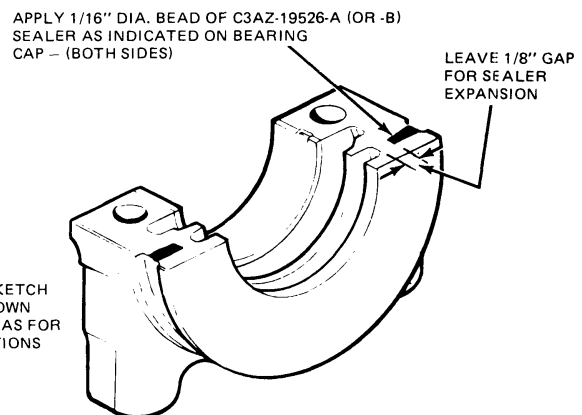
Applying RTV Sealer to Main Bearing Cap and Block
